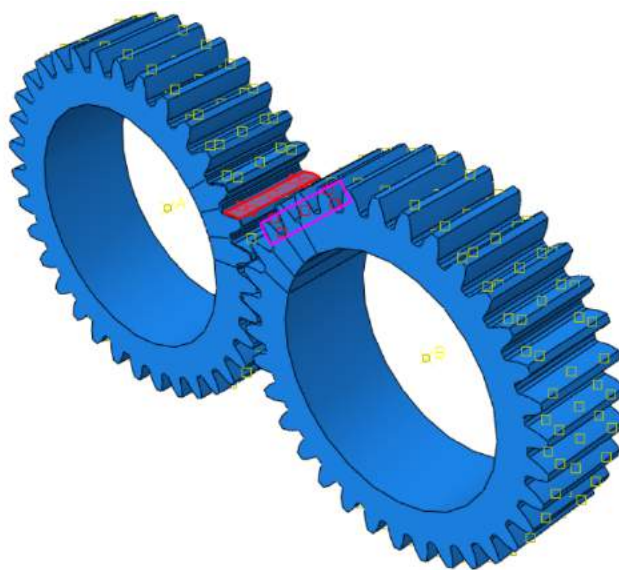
Contact surfaces of a tooth pair highlighted in red and purple, isometric view.
